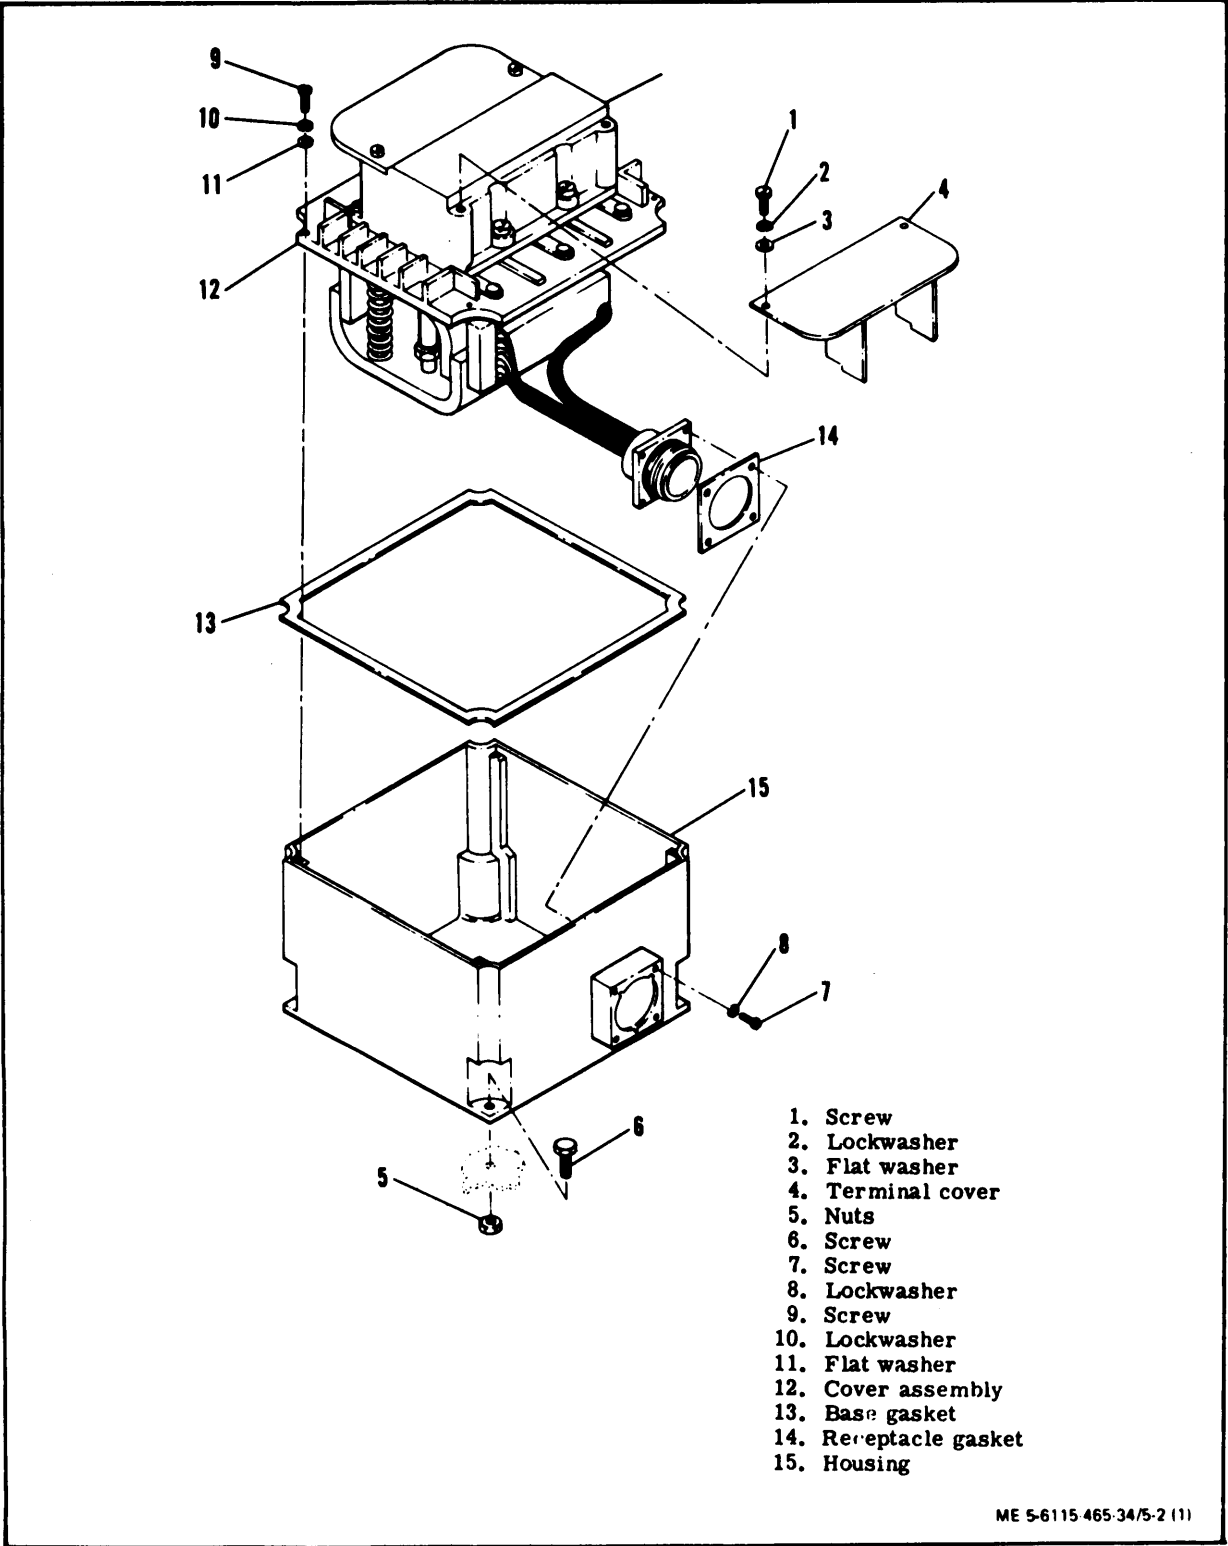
Main Load Contactor, Exploded View (Sheet 1 of 3)
